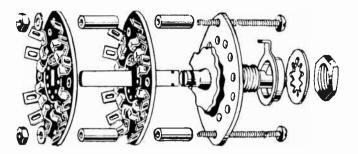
Most rotary selector switches may be disassembled for small repairs or replacement of parts.
